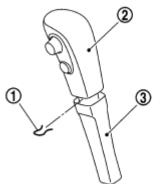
Identifying CVT Shift Selector Assembly And Ribbed Courtesy of NISSAN MOTOR CO., U.S.A.
